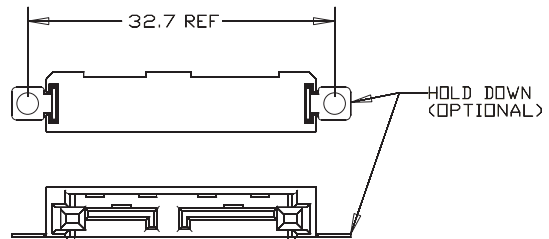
Slimline Device Plug Connector Optional Hold Down Mounting
